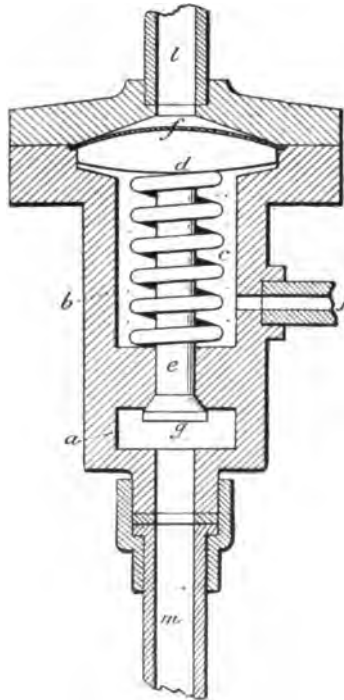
Section of the Automatic Boiler Feed Regulator of the White Steam Carriage.
